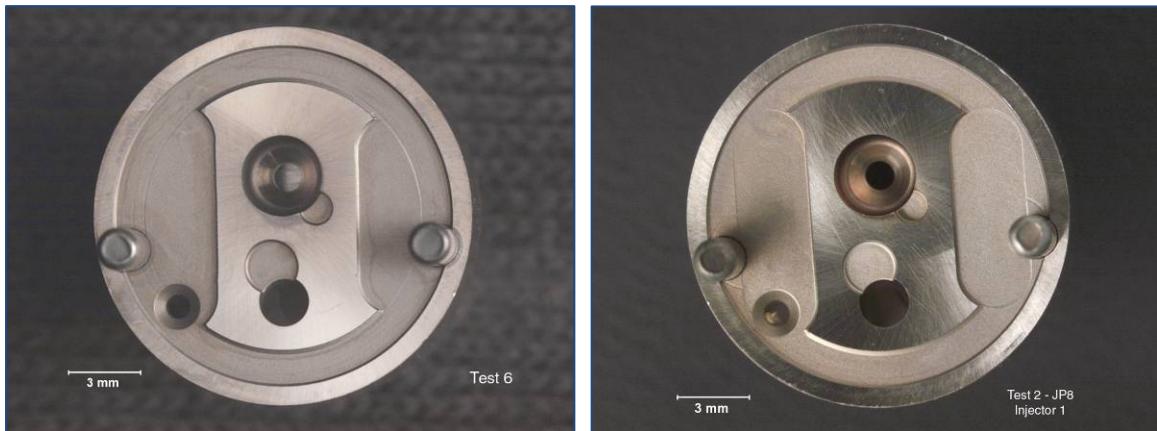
AF-8029 JP-8 (HT Left), Control Valve Plate (Bottom) , JP-8 (Base Right)
